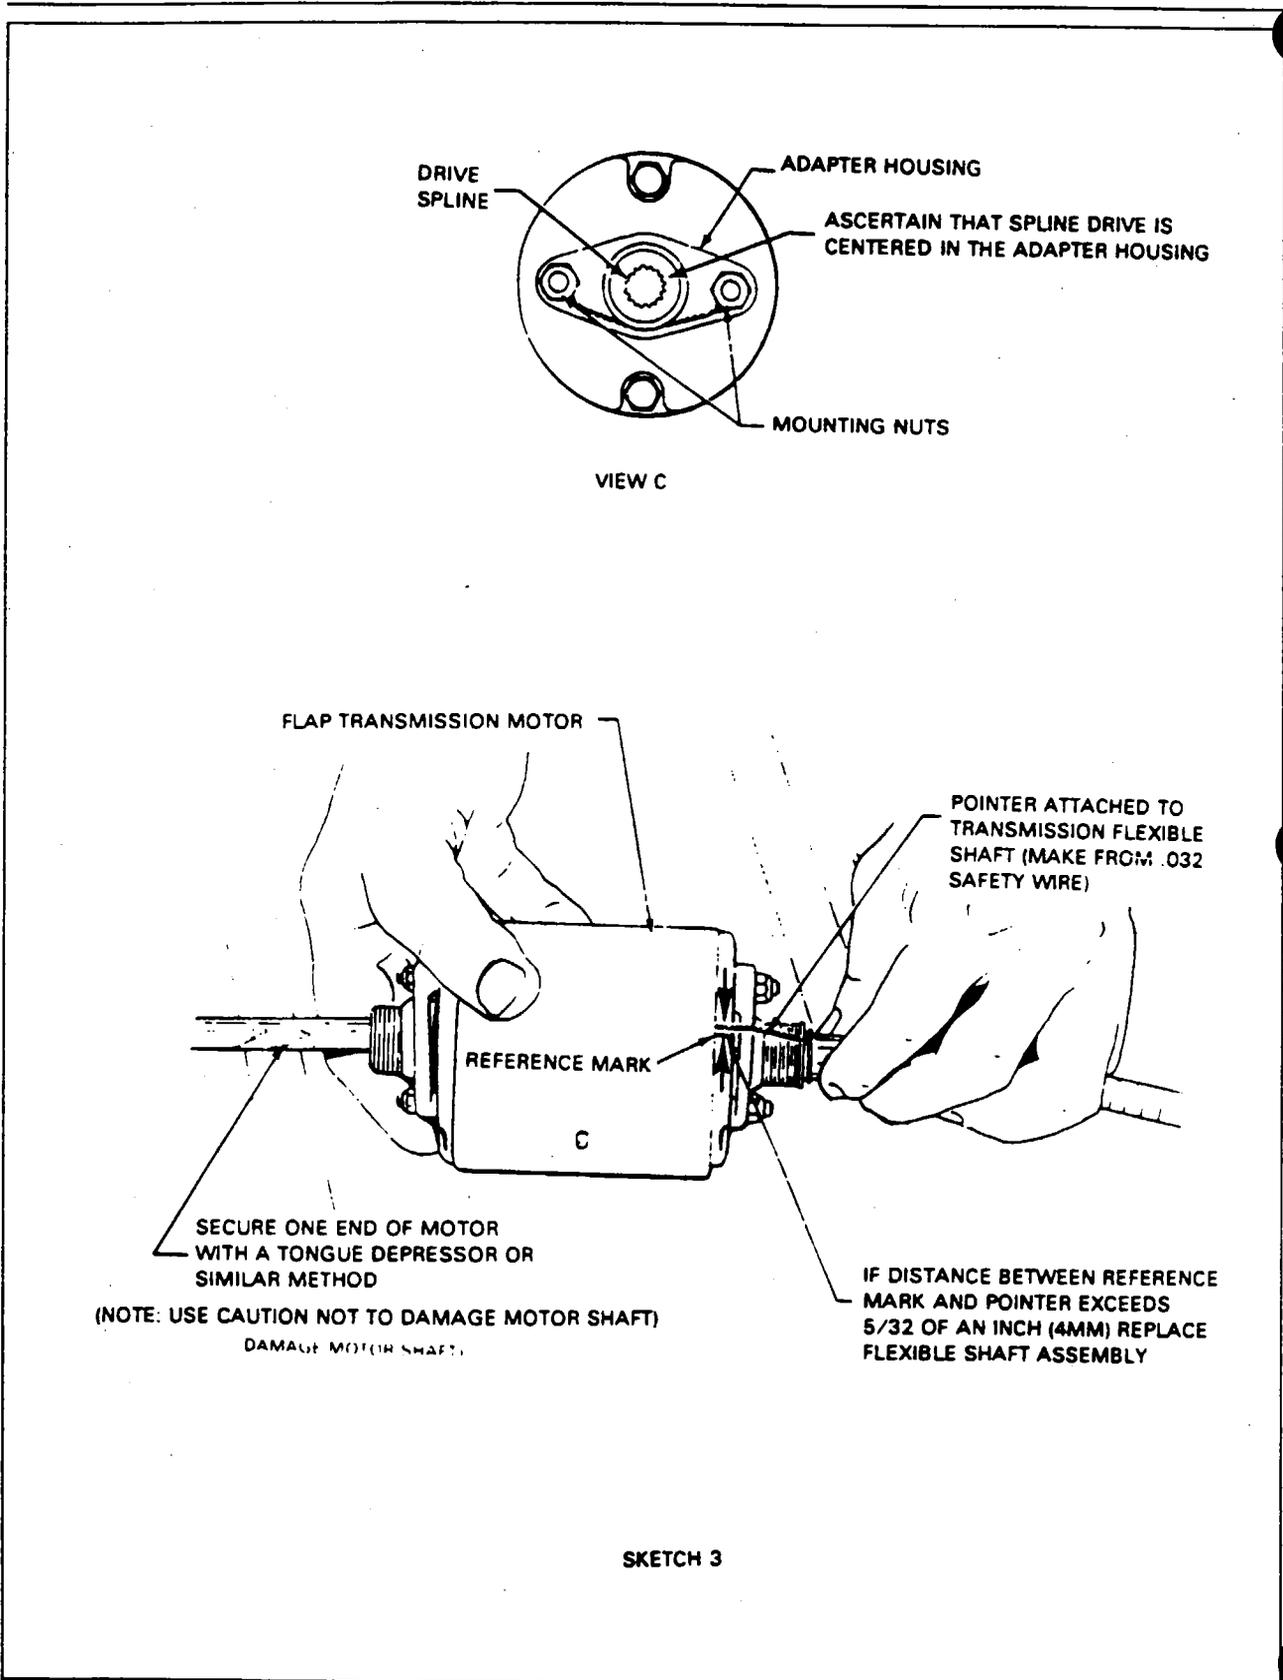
Wing Flap-Actuator Cable - 500 Hour Inspection (cont.)
